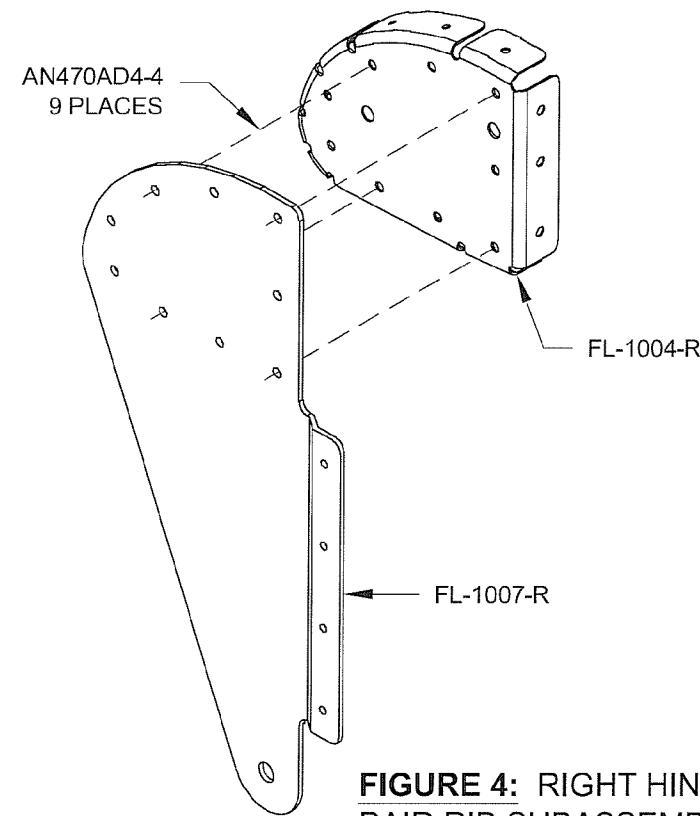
RIGHT HINGE PAIR RIB SUBASSEMBLY
